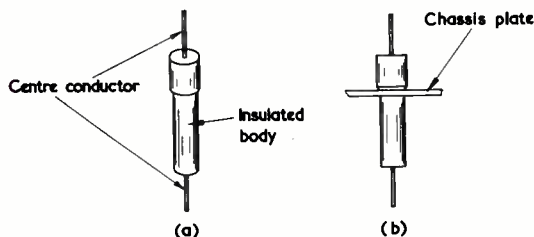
(a). The Lektrokit lead-through insulator (b). The insulator is a push fit in any of the $\frac{1}{4}$ in holes of the Chassis Plates, soldered connections being made to the protruding centre conductor on either side
